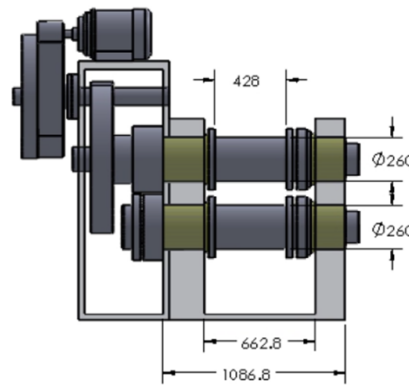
CAD Design of Roll Forge Machine with dimensions in mm.
